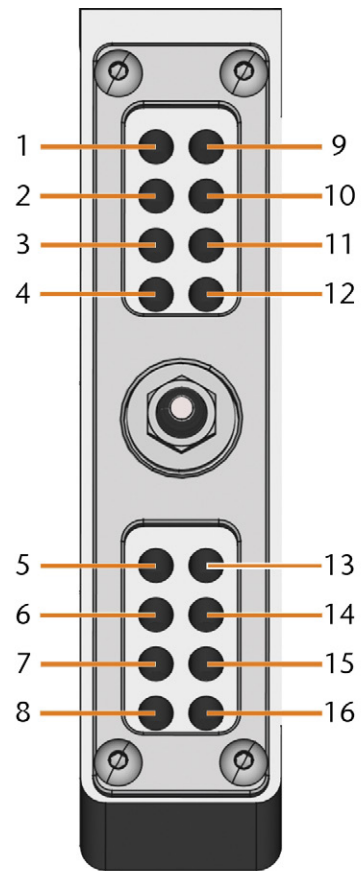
INSERTING TOOLS INTO THE TOOL POSITIONS
